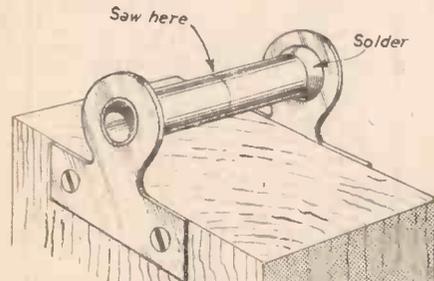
A perspective view of the headstock assembly clamped to a piece of wood.
